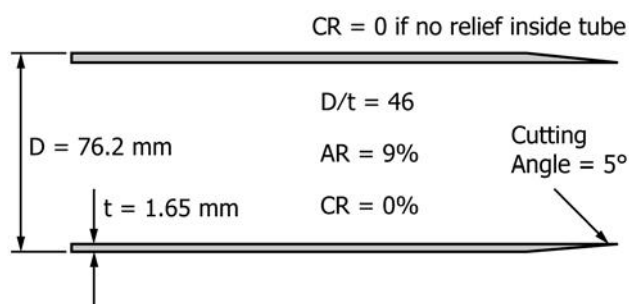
Schematic of Standard 3-in. [75-mm] Thin-Walled Tube Modified by Removing the Beveled Cutting Edge and Machining a Five-Degree Cutting Angle (DeGroot and Landon (6)).
